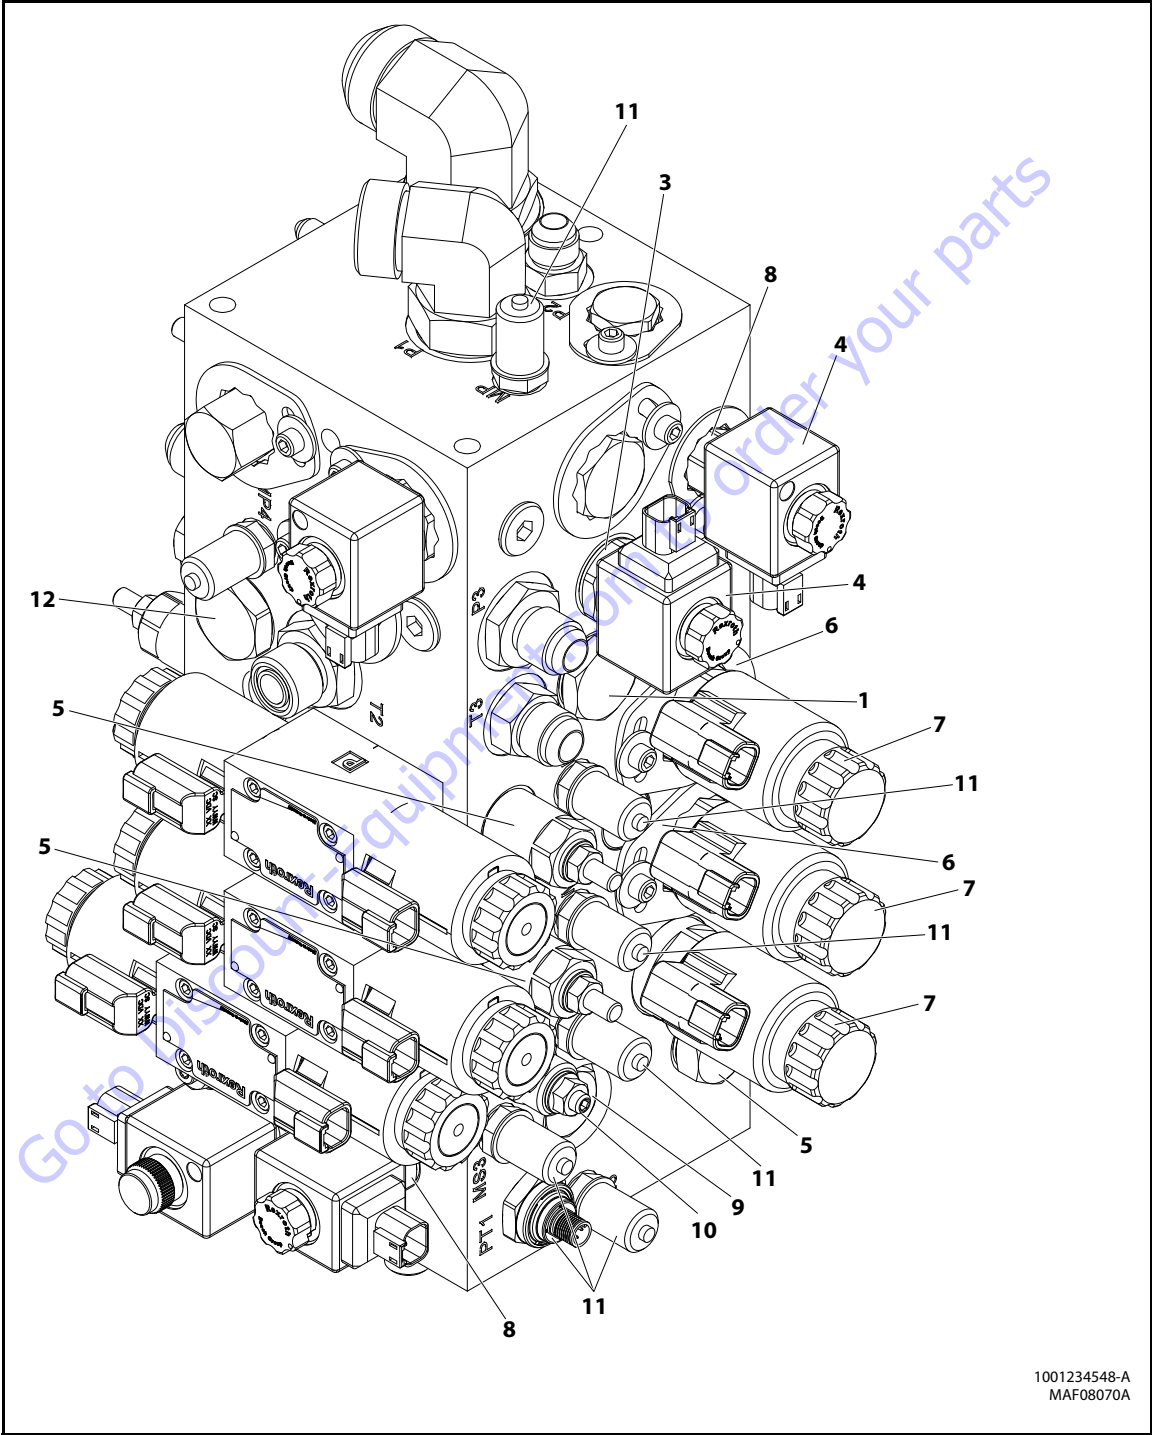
Main Valve Identification - Sheet 2 of 2
